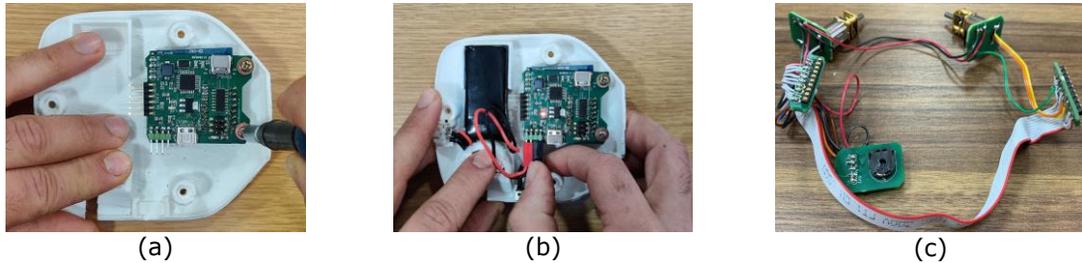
Mainboard mounted inside the 3D-printed controller housing (a), lithium battery inserted inside the controller housing (b), and the electronic boards, motors, and potentiometers are soldered together for the assembly process (c).
